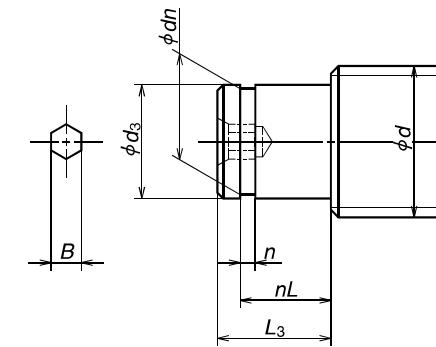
Shaft end configuration of R Series (opposite to the drive side)
